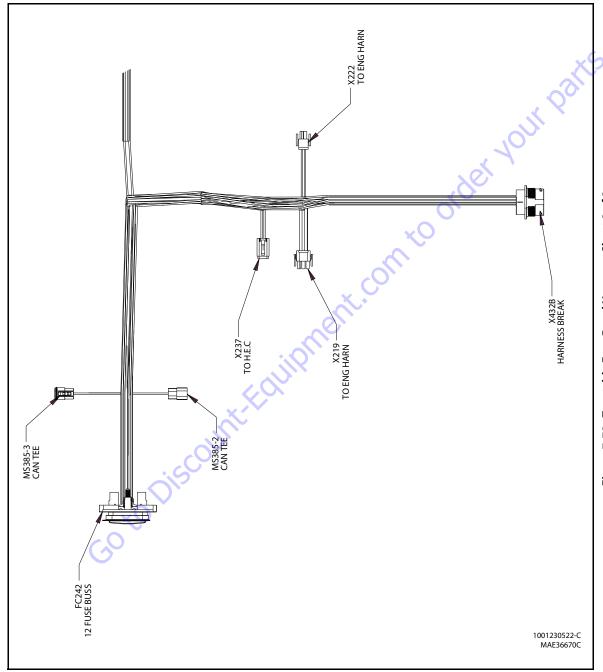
Turntable Fuse Panel Harness - Sheet 2 of 3
